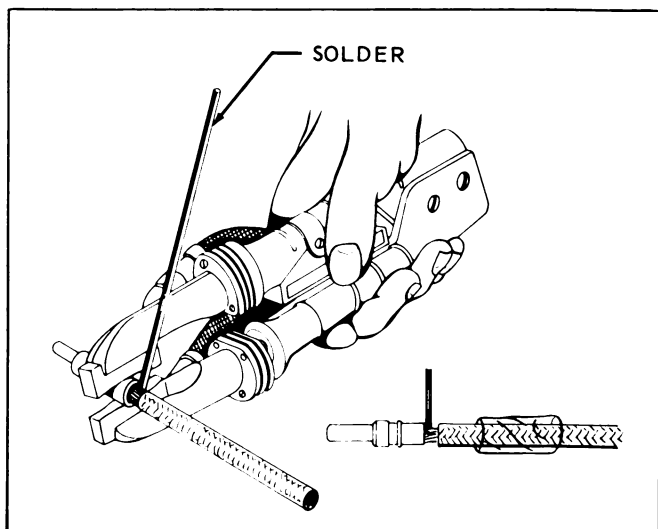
Resistance Soldering Pliers for Large Contacts
